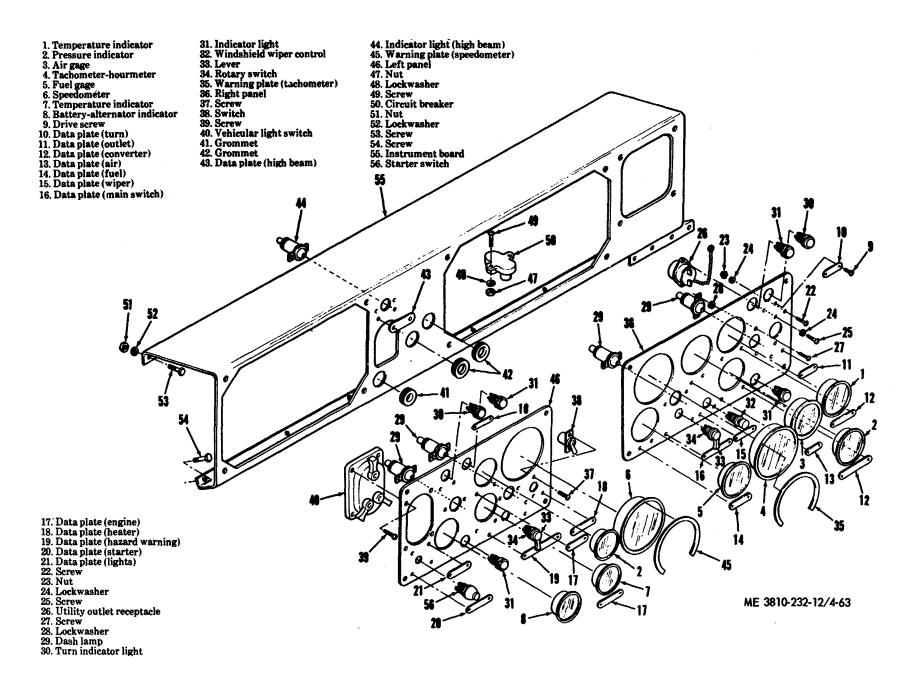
Carrier instrument panels, disassembly and reassembly (model 2585)
